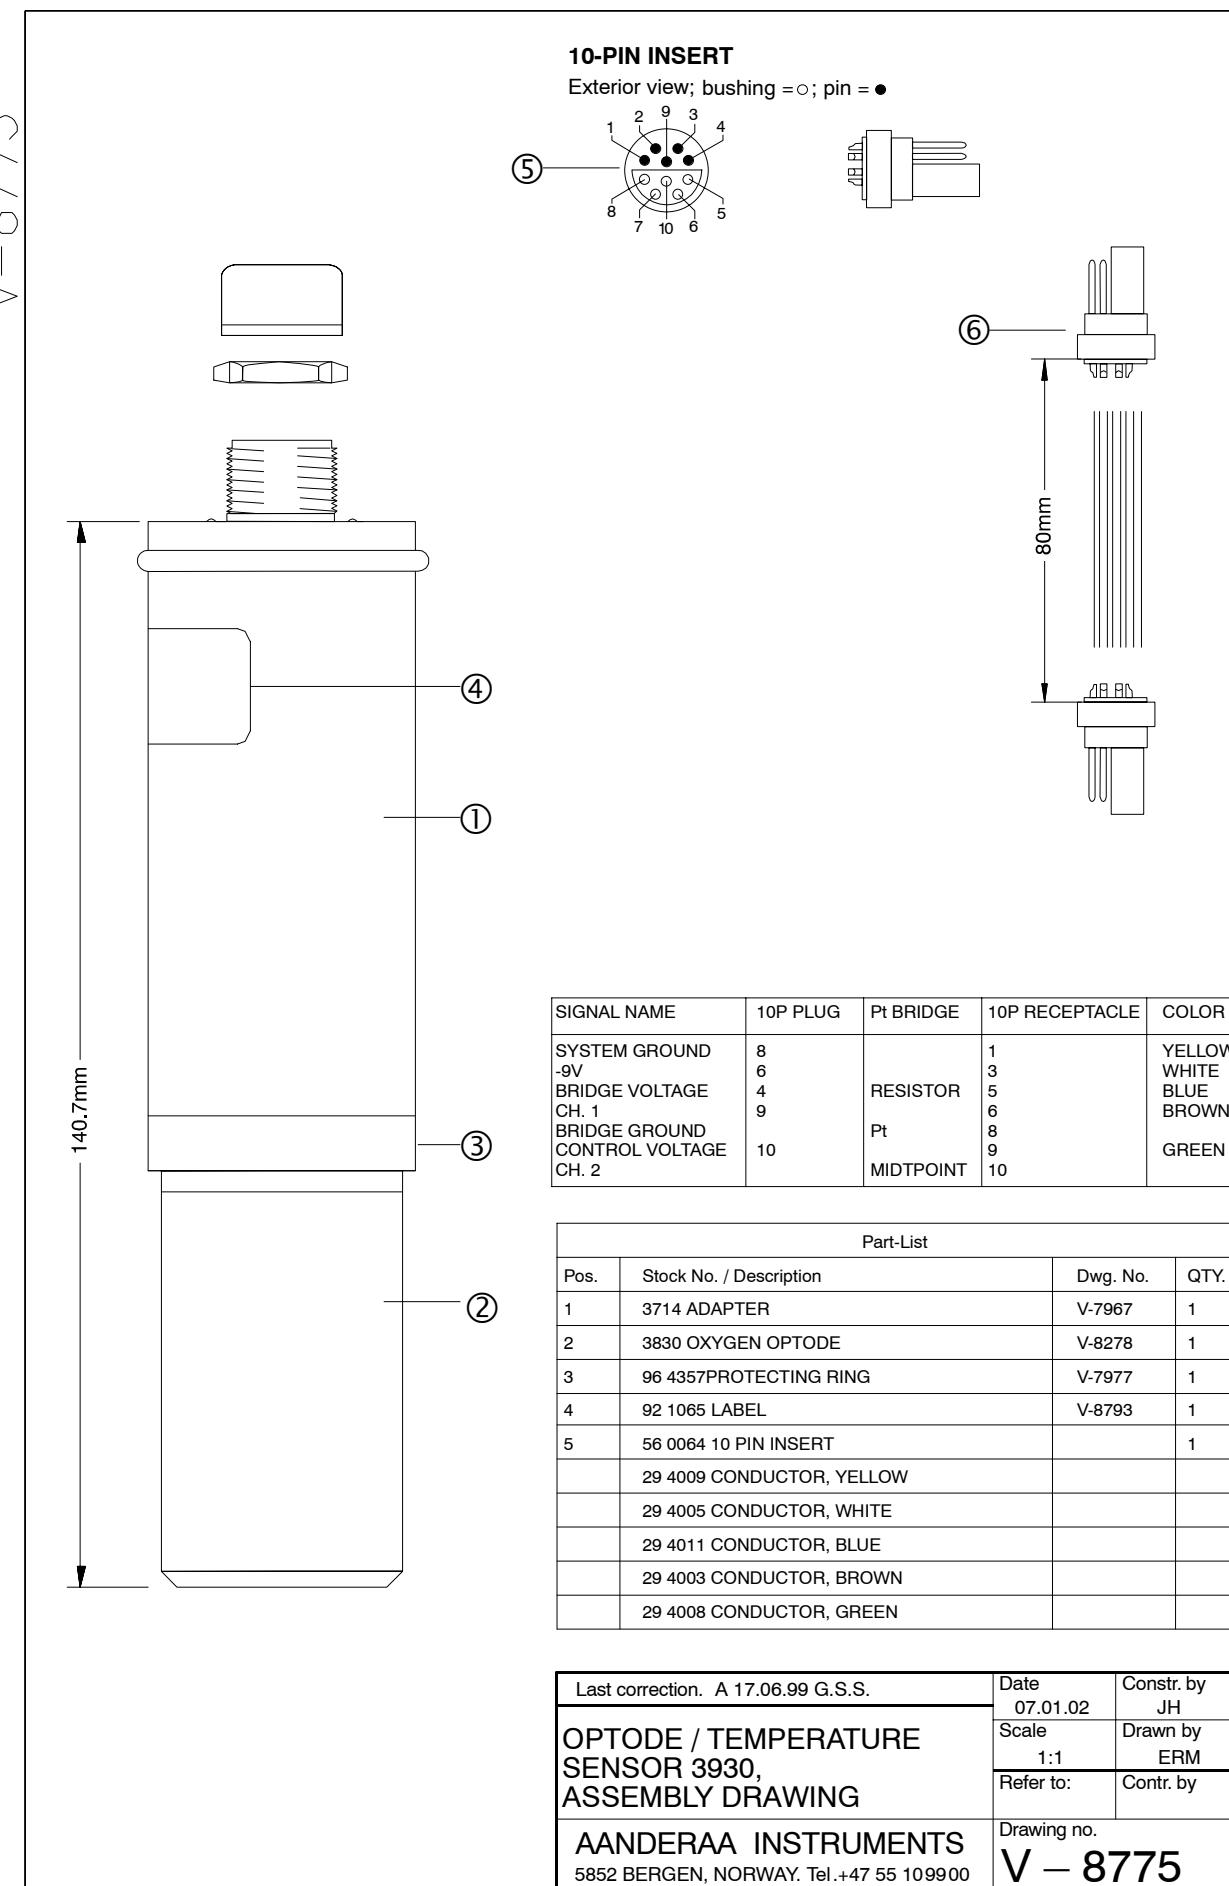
Assembly Drawing Oxygen Optode 3930
